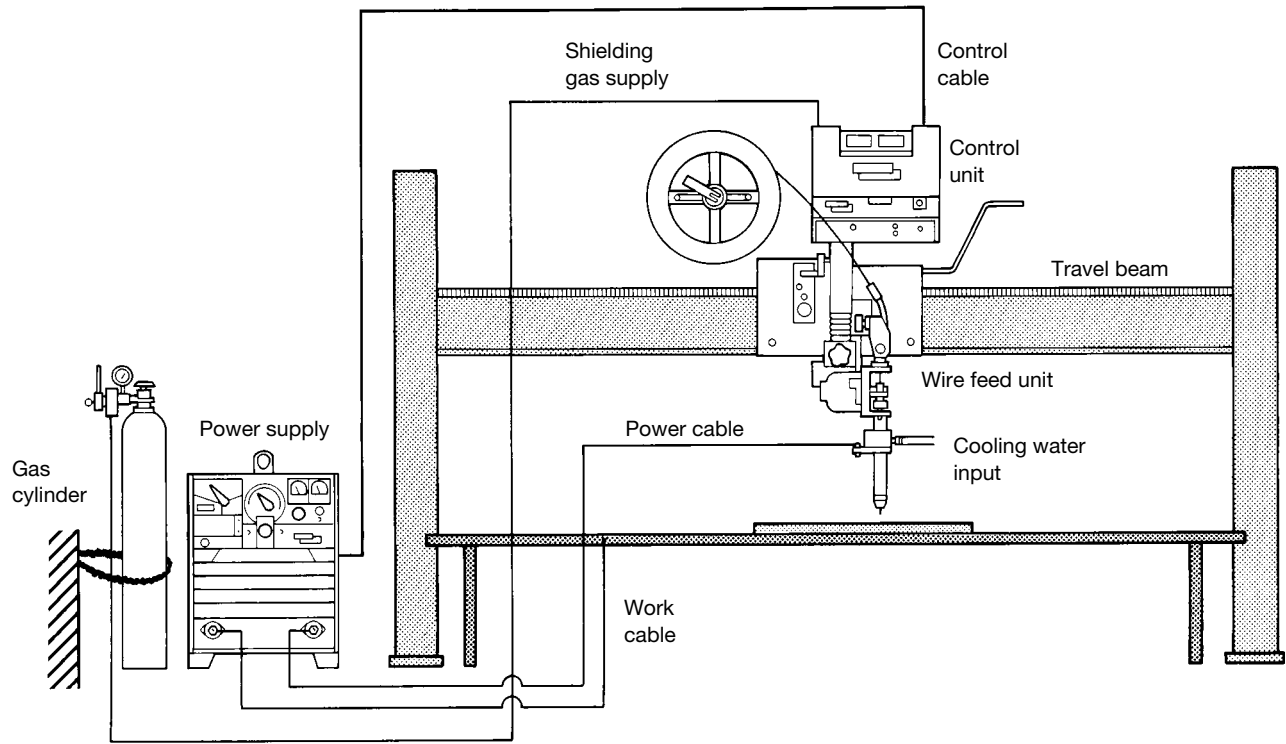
Automatic gas metal arc welding installation.
